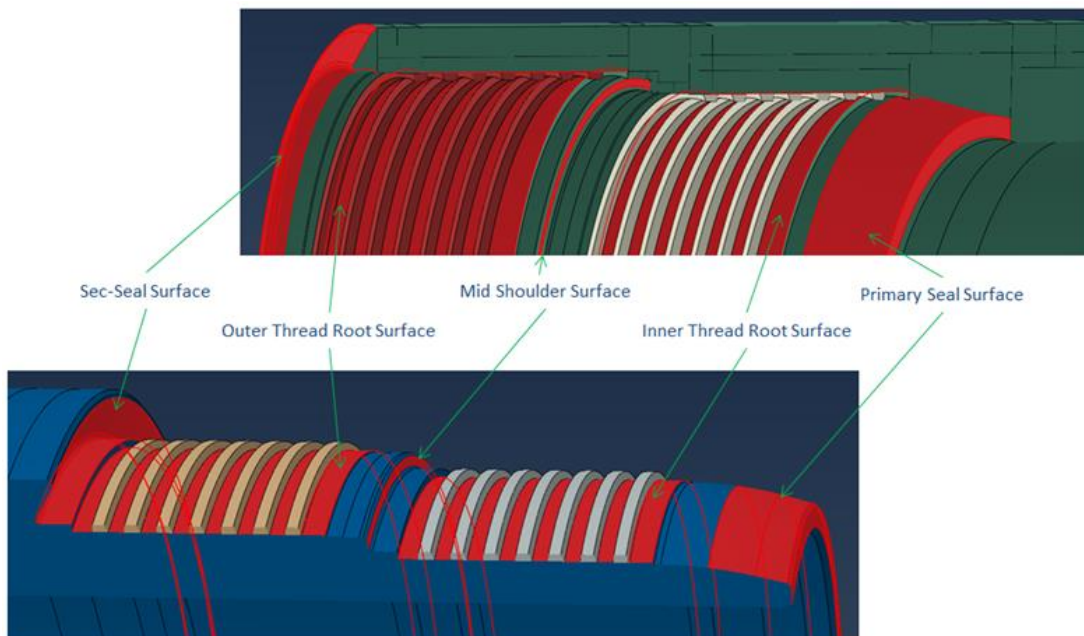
Cut-view of box and pin contact surfaces highlighted in red.
